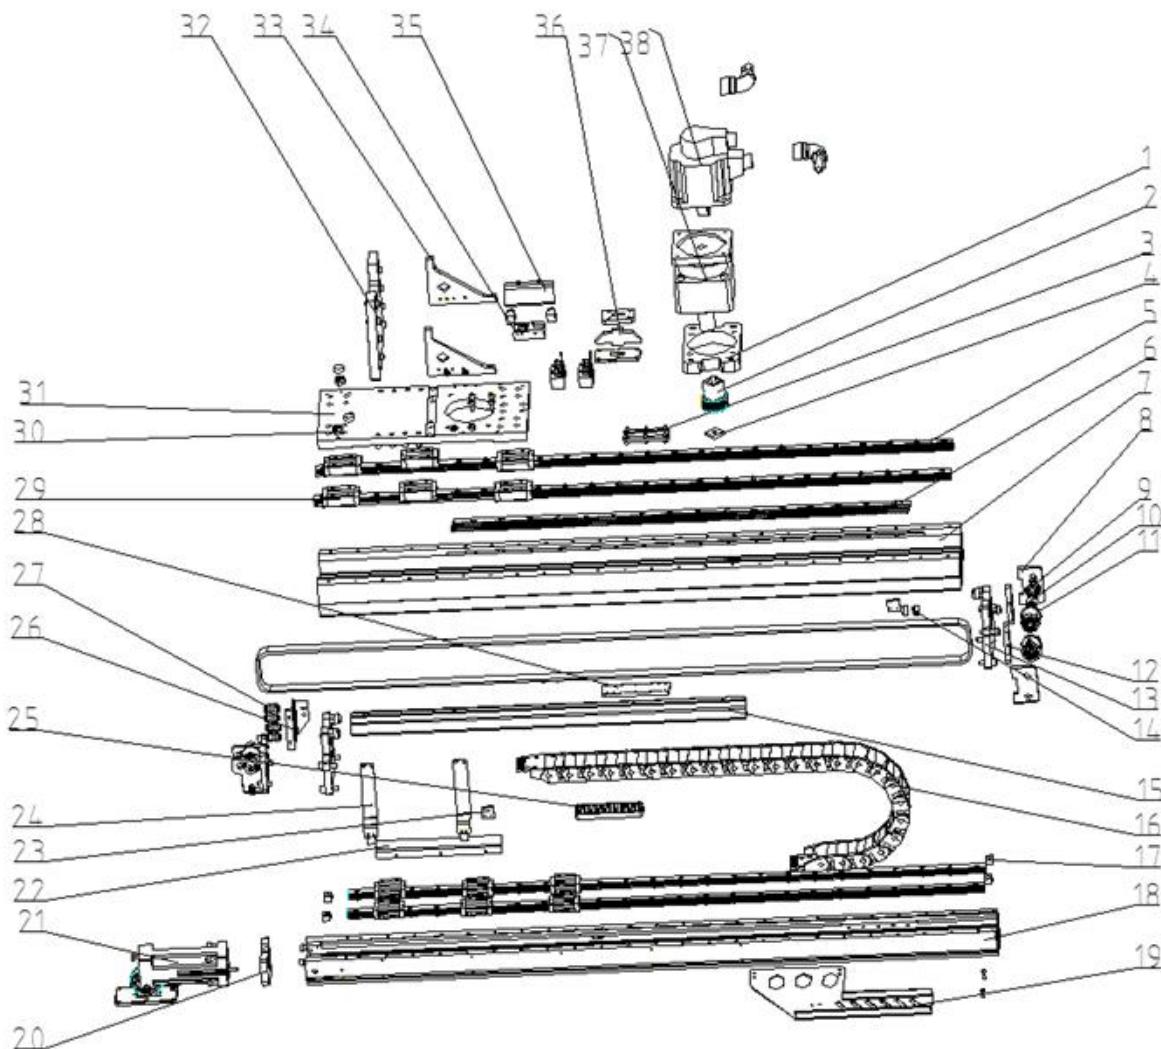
ST3-MT Main-arm unit(telescopic arm) exploded view
